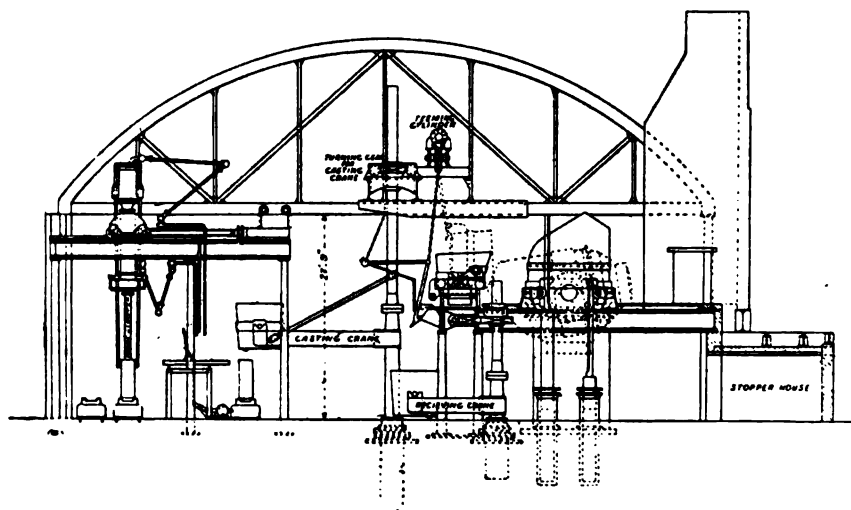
Bessemer Plant. Sectional Elevation. (Barrow Works.)
